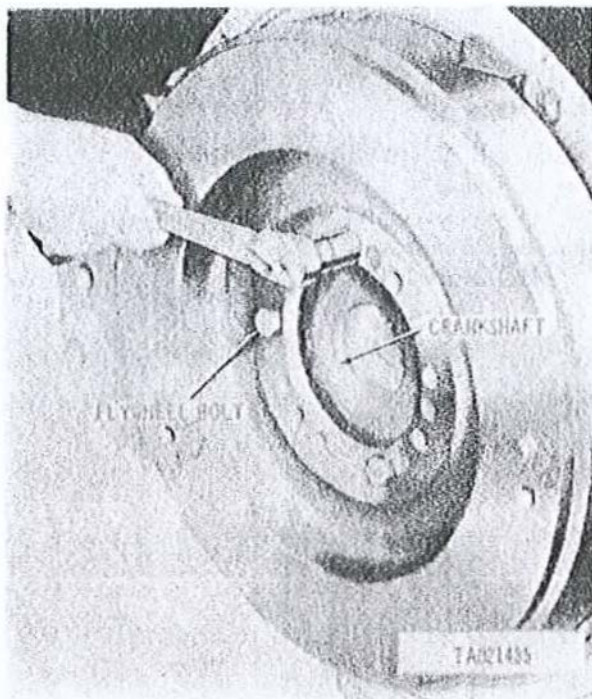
Installing flywheel and transmission drive spur gear on crankshaft.
